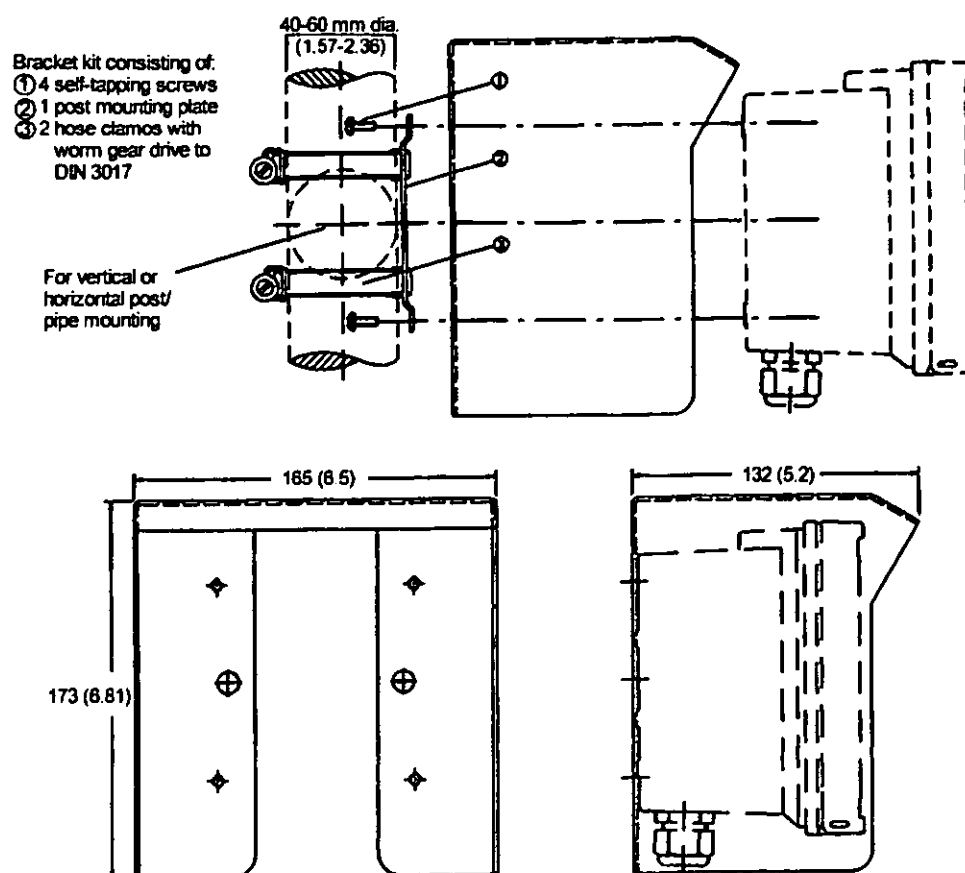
Dimension Drawing for APT4000 with Wall or Pipe Mounting
